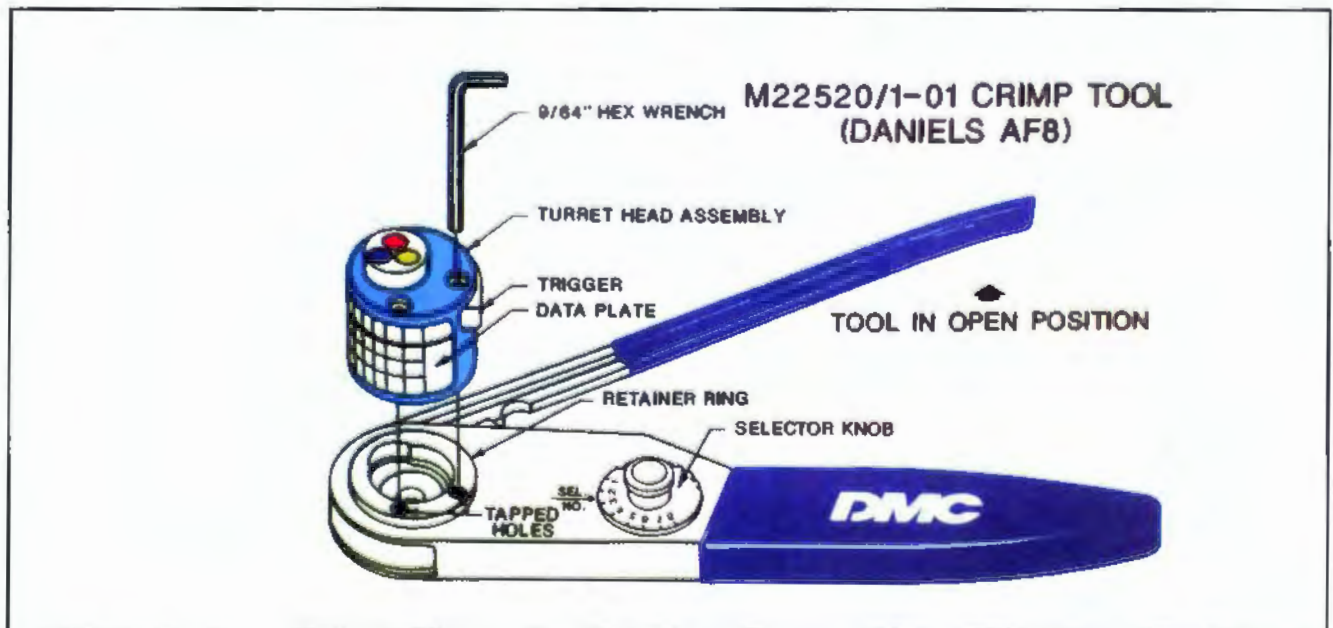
The Daniels® AF8 ratcheting crimp tool requires a positioner turret assembly that accommodates several sizes of contacts.
